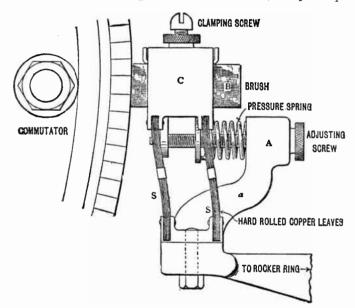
Crocker-Wheeler brush holder. The carbon brush B is firmly clamped in the "box" C by two screws which bear on a sheet of brass to protect the carbon from being broken by the ends of the screws. The box C is carried by four flexible springs S S, one at each corner and formed of hard copper leaves. These are fixed at one end to the box and at the other to the solid base which is in one piece with the spoke attached to the rocker ring. An adjusting screw passes through appropriate lugs on the box C and loosely through the head A of a fixed arm a. Between the lower surface of a and the upper lug on the box C is placed the pressure spring.
